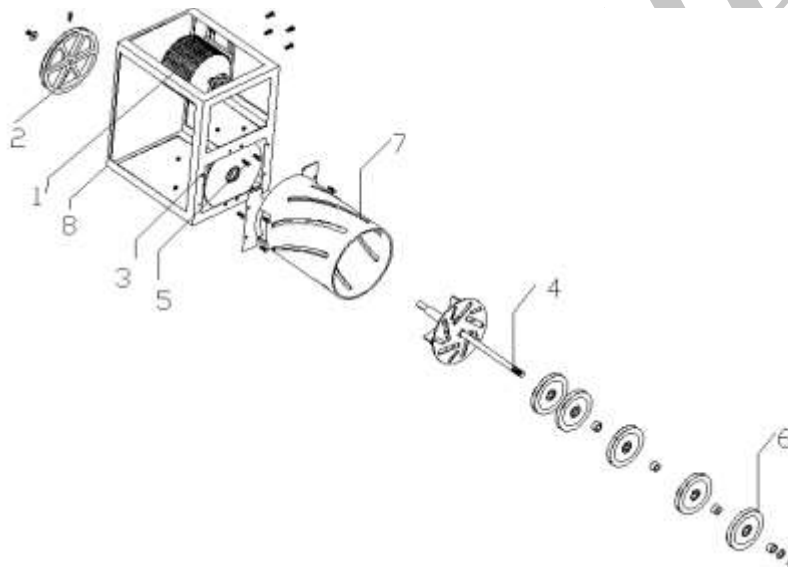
The exploded diagram of the machine: 1. Electric motor 2. Moving pulley 3. Set of stimulus pulleys 4. Shaft 5. Holder Plate for grooved cylinder with a set of bearings 6. Abrasive wire brushes 7. Grooved cylinder 8. Chassis
